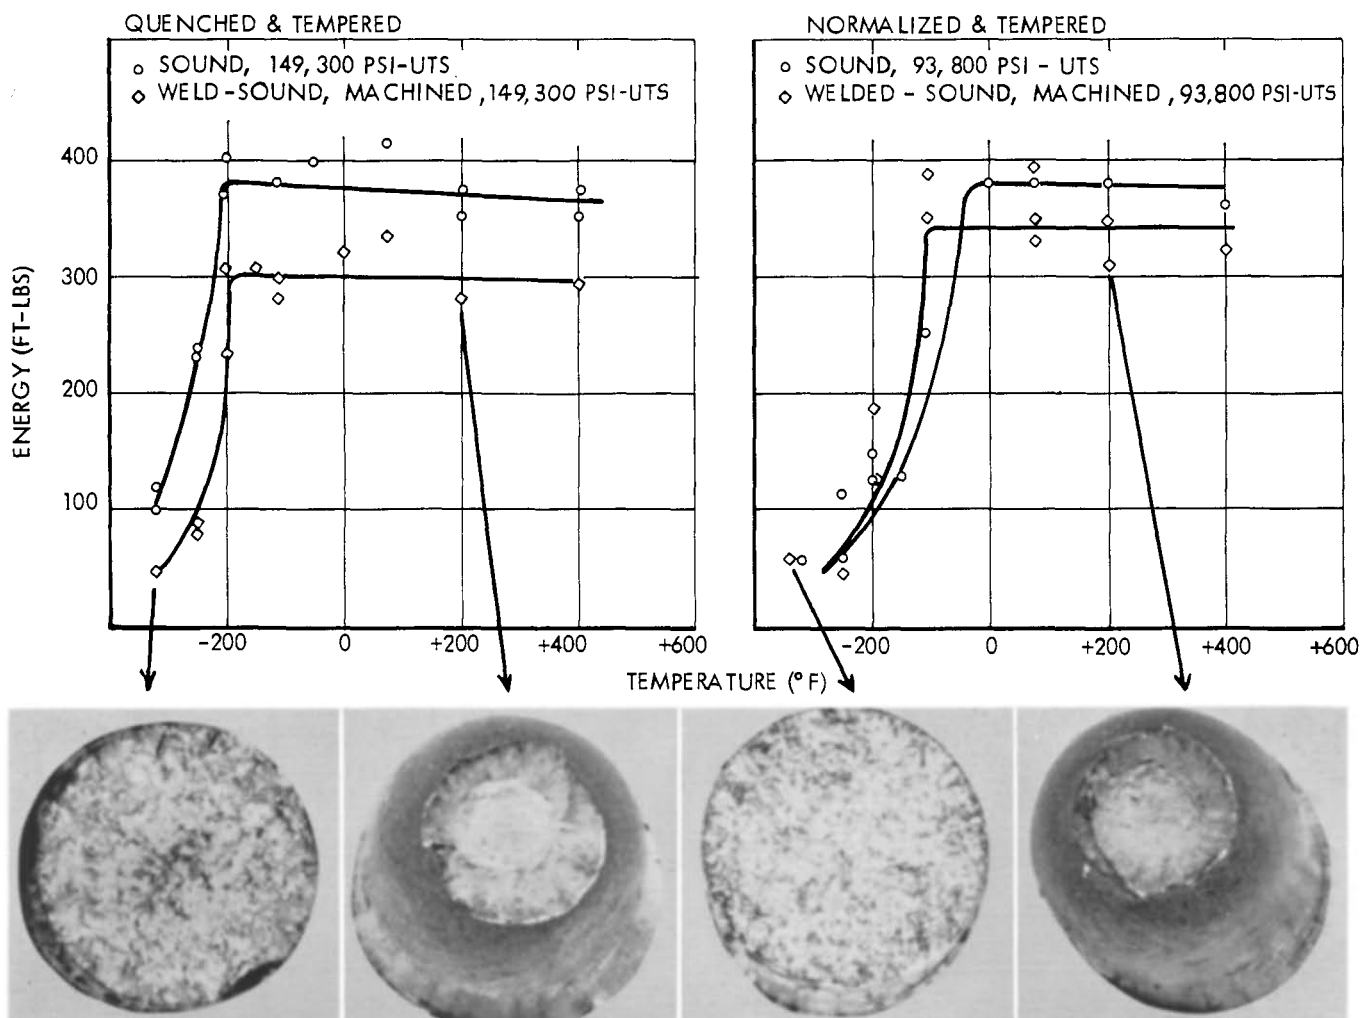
Tension impact test results of sound cast steel and sound welded, machined specimens.
